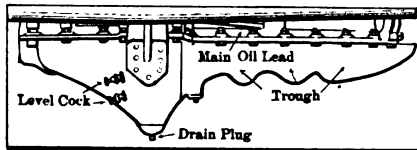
View of the lower part of the Ford crankcase casting, showing the exterior of the splash troughs and the flywheel casing
